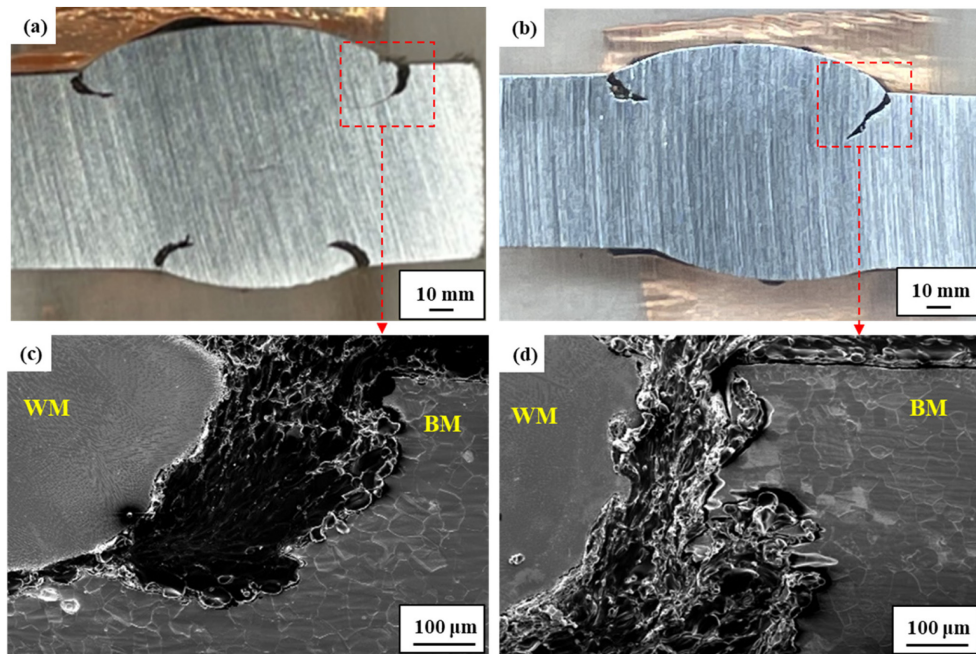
(a,b) Cross-sectional macro image of the welded samples, observed after immersion in ASTM G48-C solution at 60 °C for 72 hours; (c,d) cross-sectional micro image of the welded sample which had been annealed at (a,c) low temperature and (b,d) high temperature
